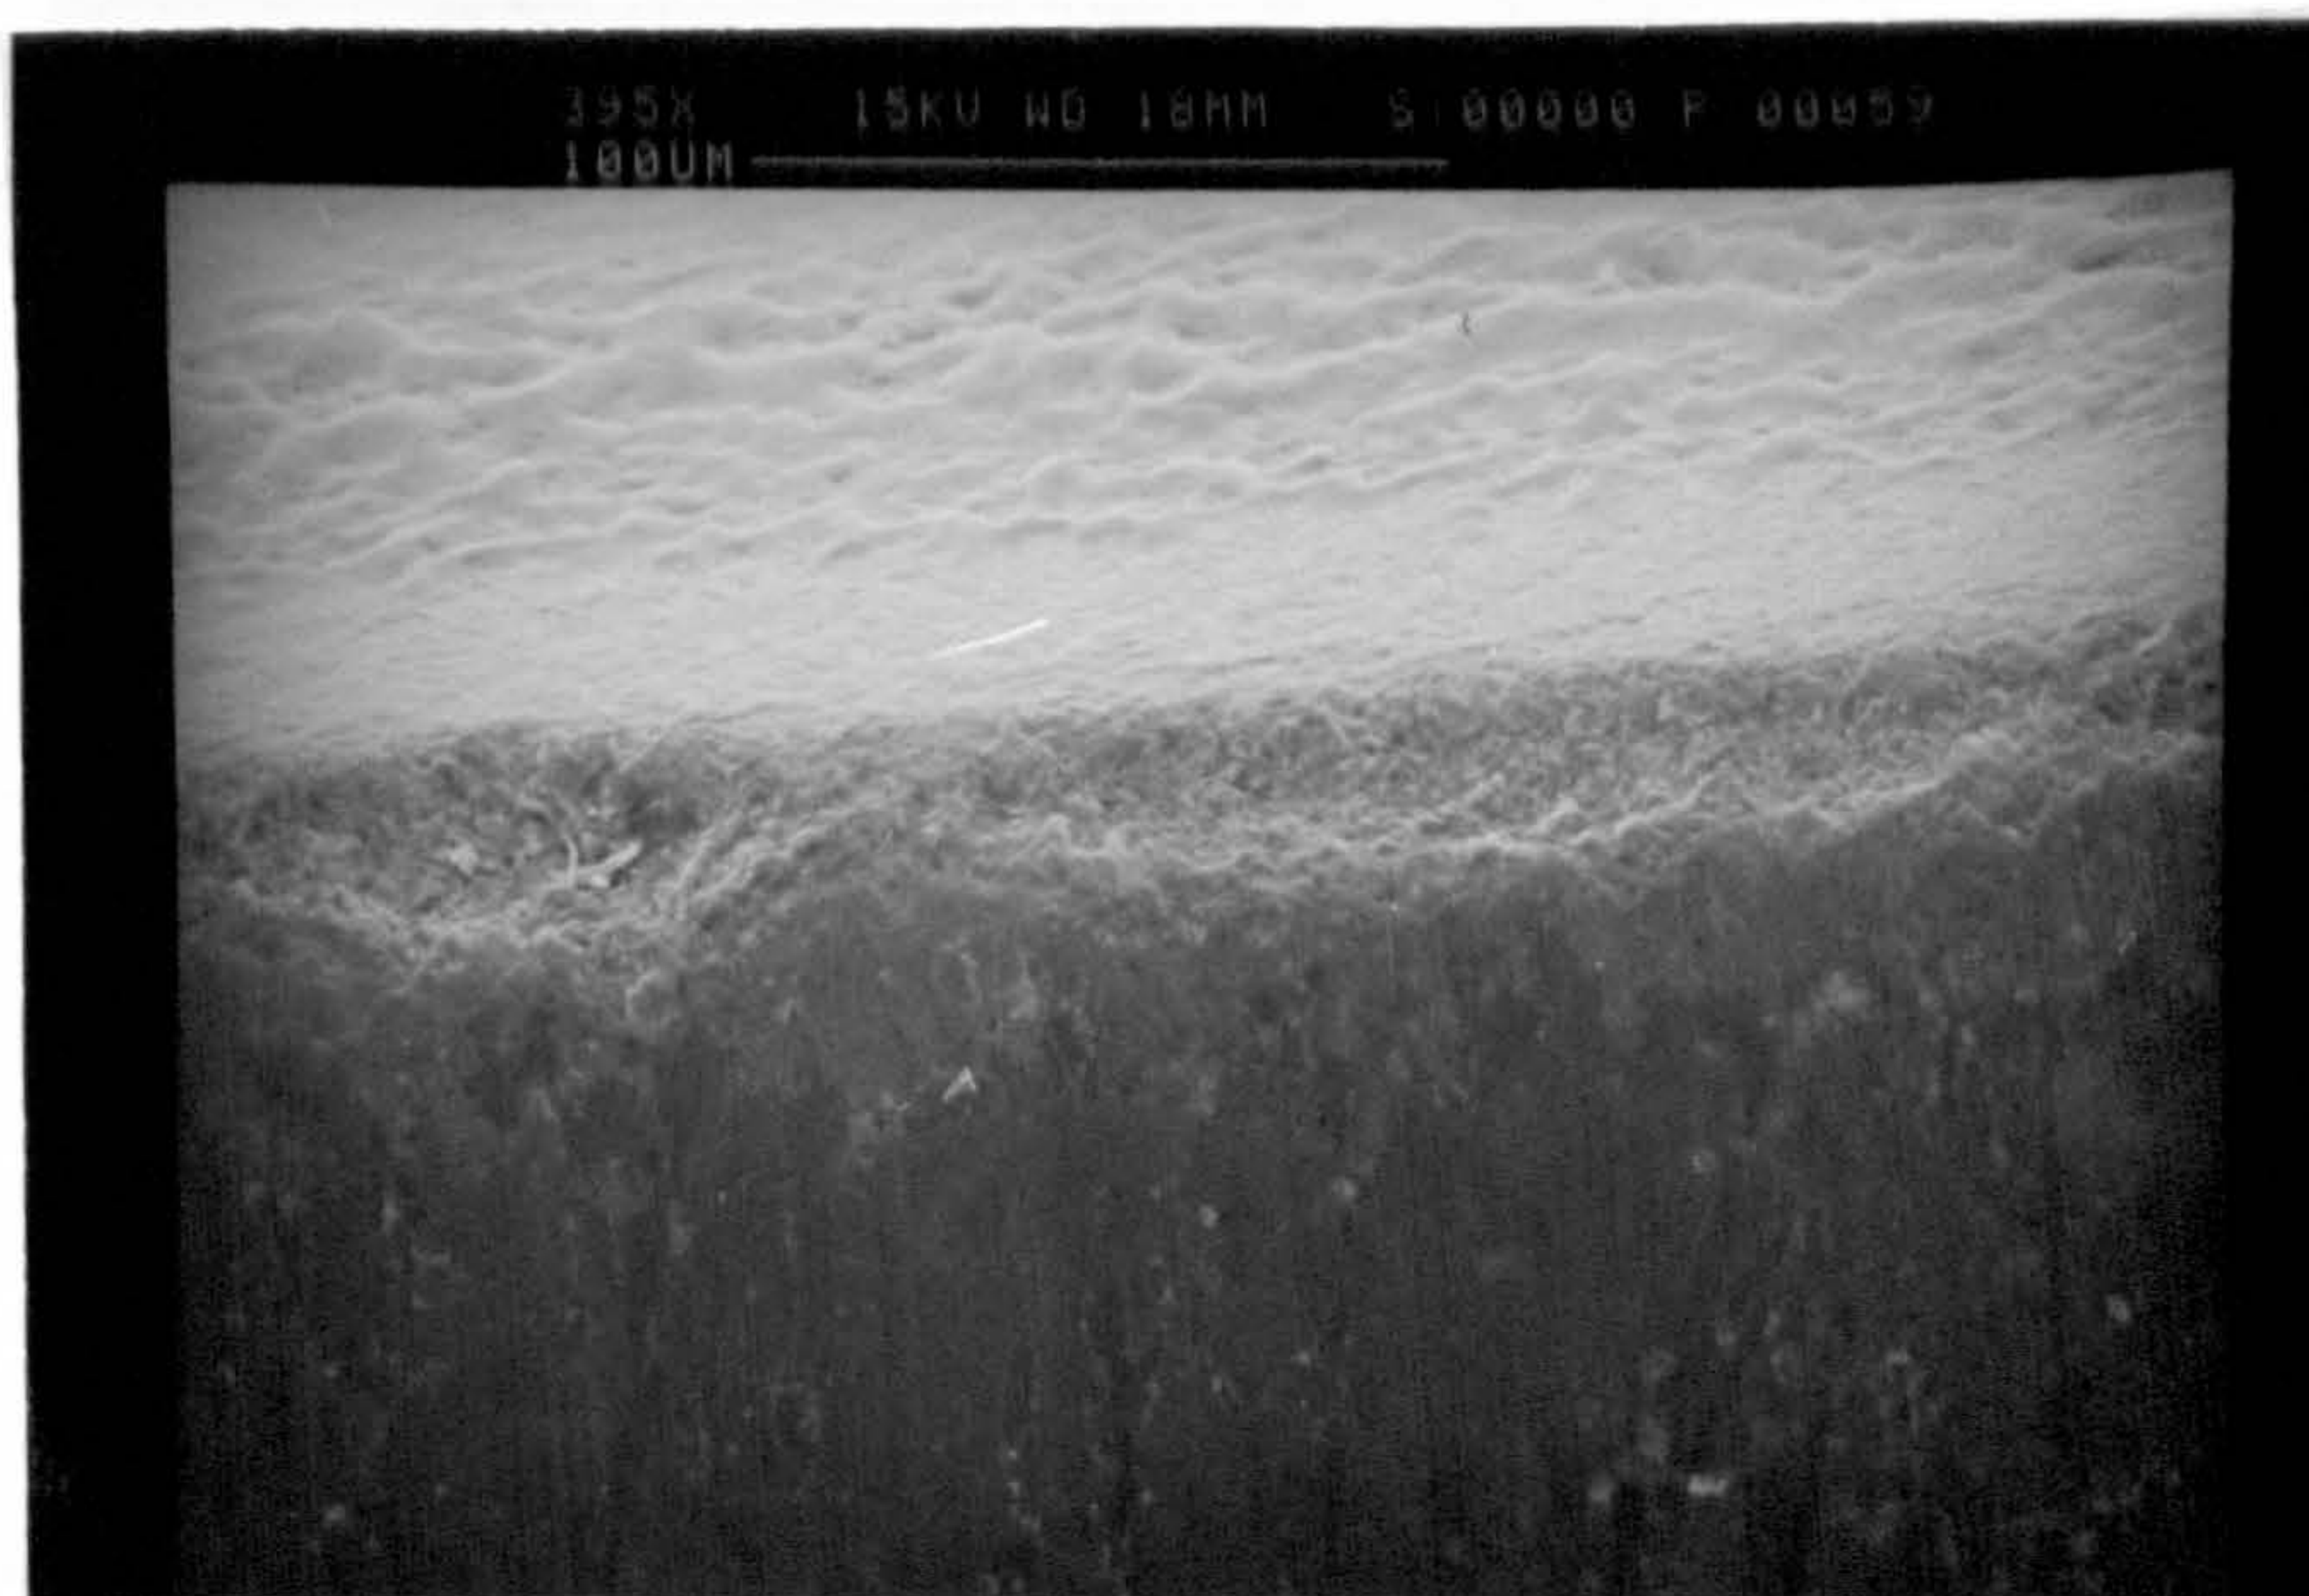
Chipping at the cutting edge of a triple-coated carbide tool
